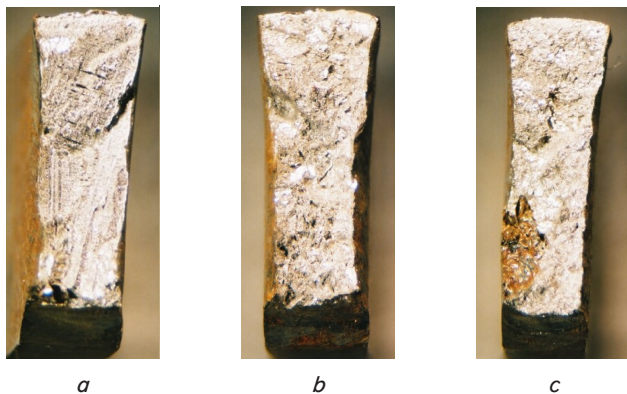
Fracture surface after the impact test: *a* – F15; *b* – F20; *c* – F25
